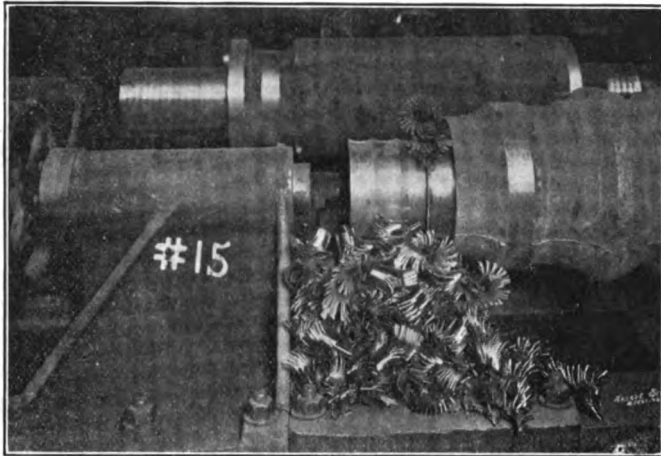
This cut shows a molybdenum roll in the lathe and the turnings cut from it. It is particularly interesting to note that these turnings formed in highly blued, tough, strong springy spirals, indicating a similar quality in the steel, far superior to any that has been observed heretofore. The very noteworthy fact was encountered that, although these rolls developed a scleroscope hardness of 50 to a depth of about six inches, they still possessed the toughness of low carbon steel.
